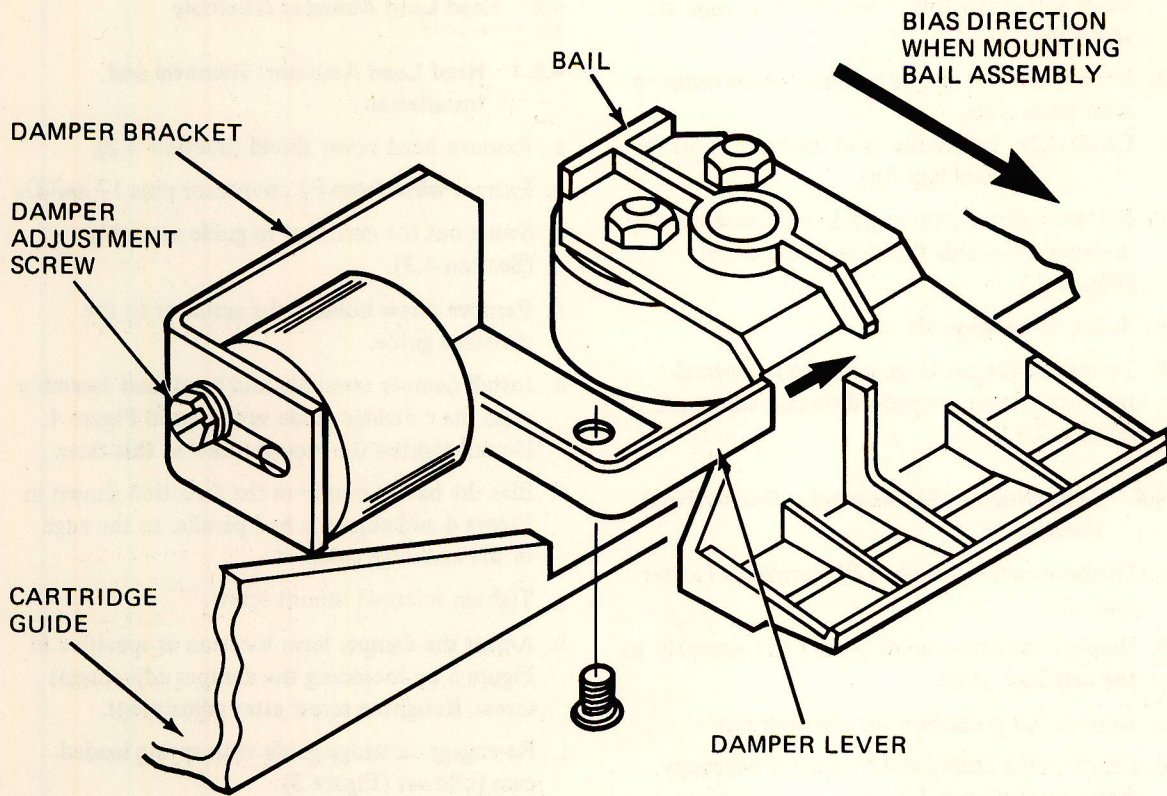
DAMPER AND HEAD LOAD POSITIONING
